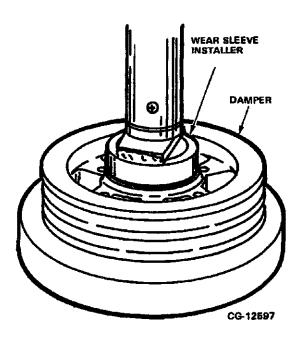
Install a New Vibration Damper Wear Sleeve
